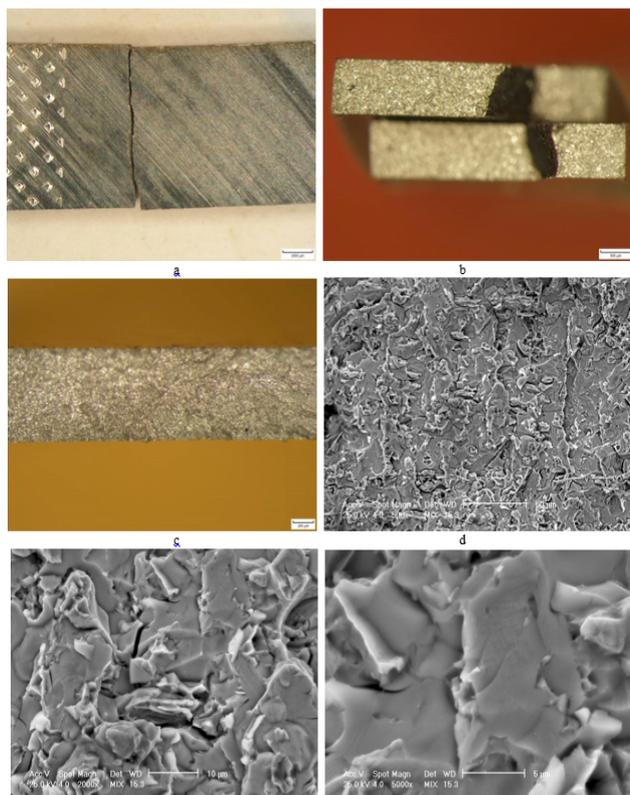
Fractographic aspects of CoCrMoTiZr surfaces after tensile test: a, b, c- stereomicroscope images; d, e, f- cross sectional SEM images
